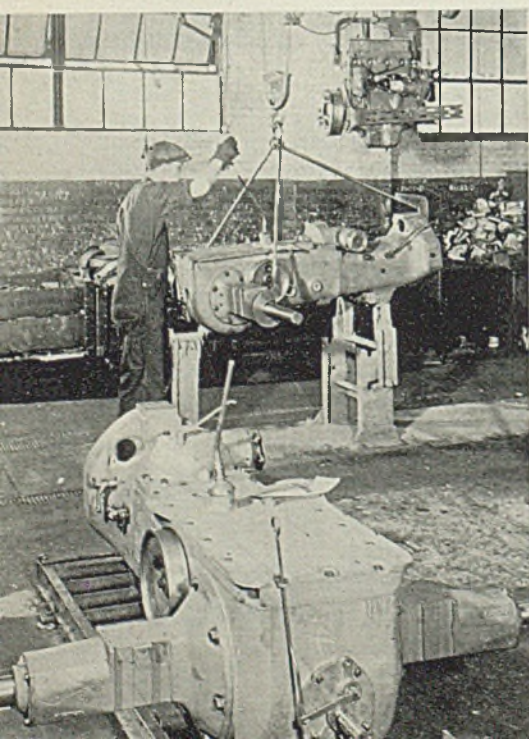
The main frame of a Farmall tractor settles into position on the assembly line dolly. Frame for next tractor is seen waiting at end of sub-assembly line
